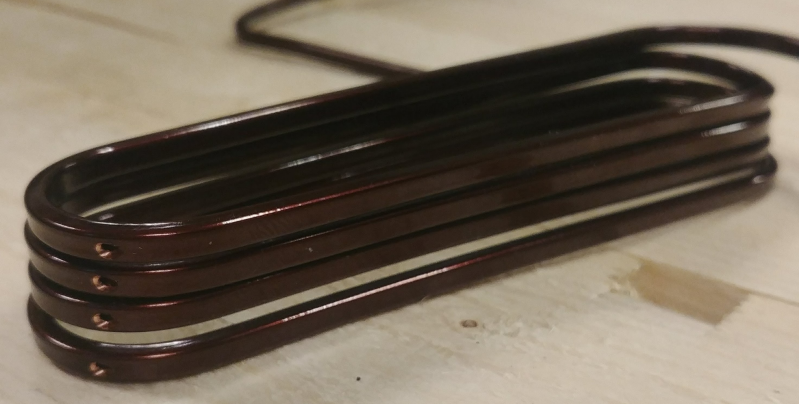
Photo of coiled rectangular hollow winding with drilled holes creating parallel cooling channels.
